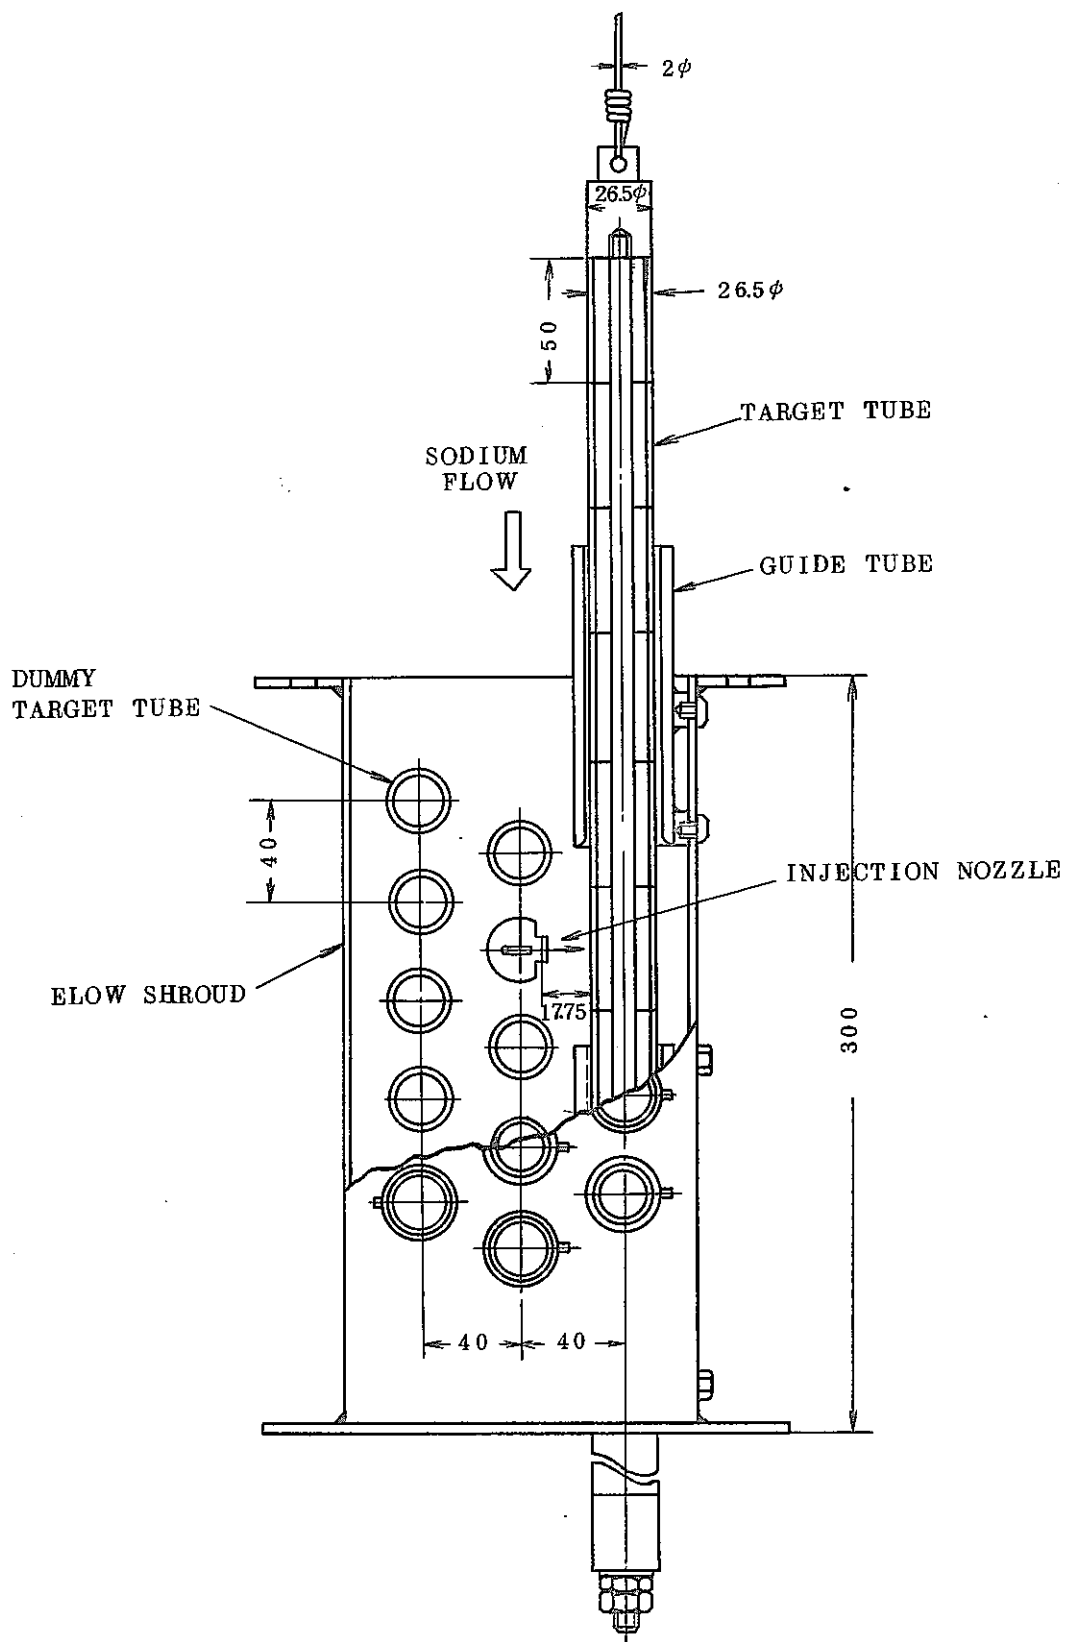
2 CROSS SECTION OF TARGET ASSEMBLY, TEST № 10~49
